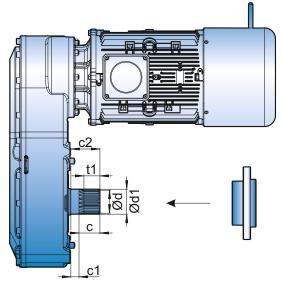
Sliding Shaft (DIN 5480) Connection Dimensions and Tolerances
